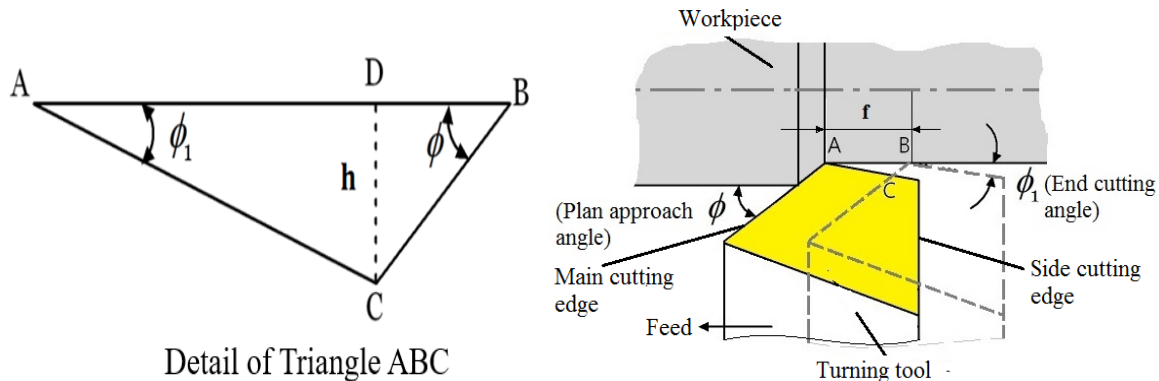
Geometric Approach to Workpiece Surface Roughness in Turning Process
